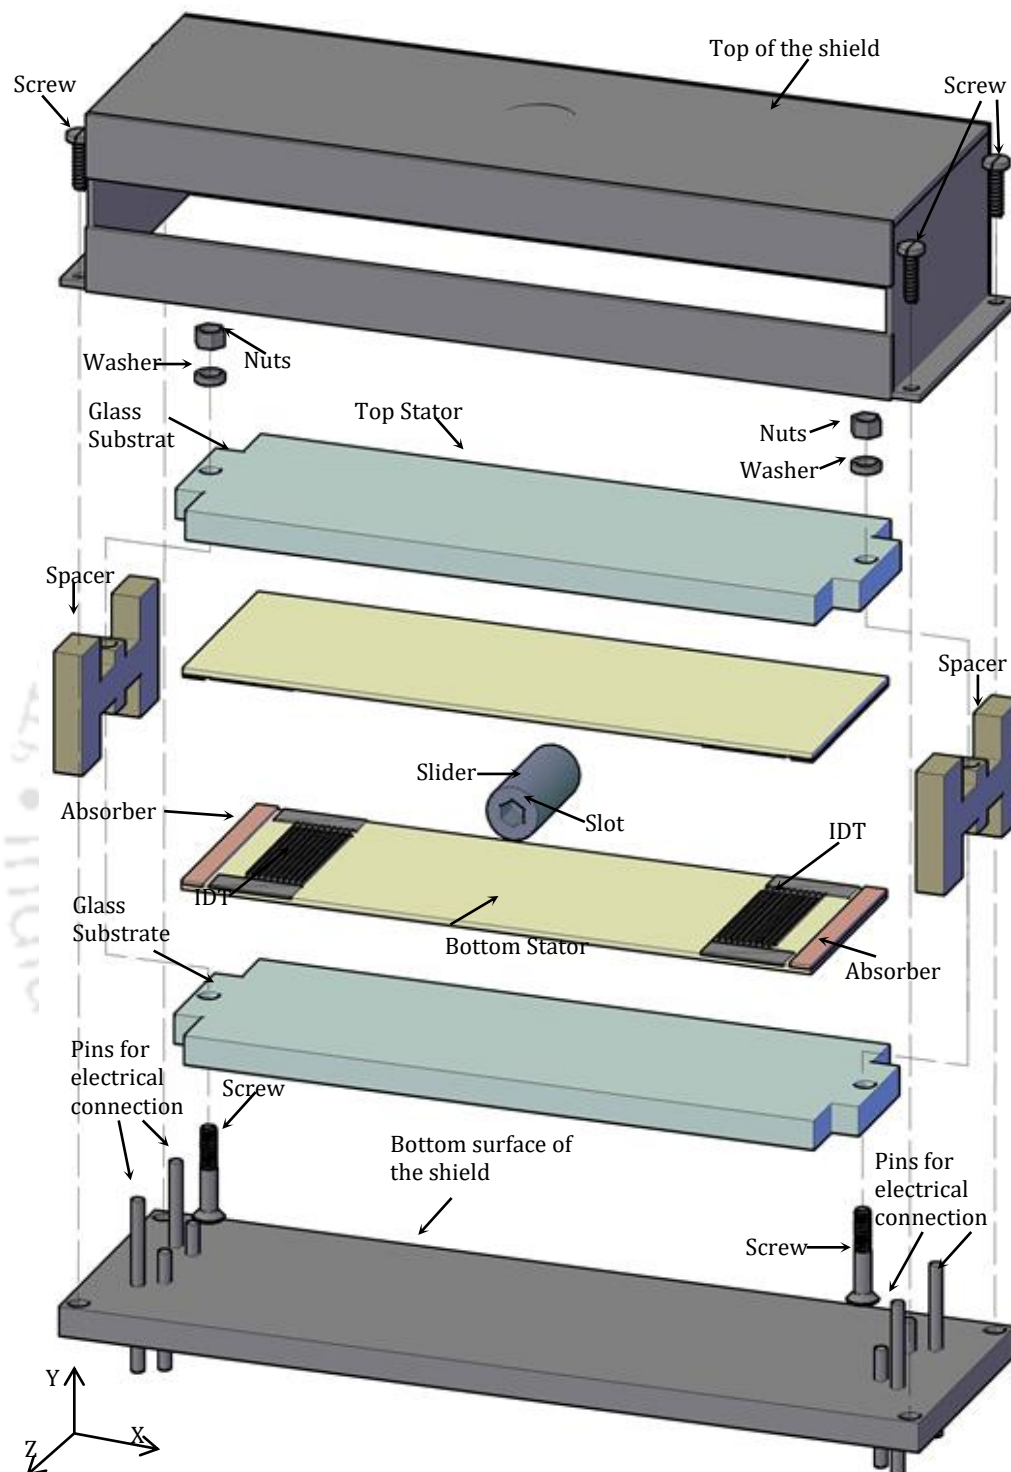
35: Exploded view of the SAW motor with a cylindrical shaft.
